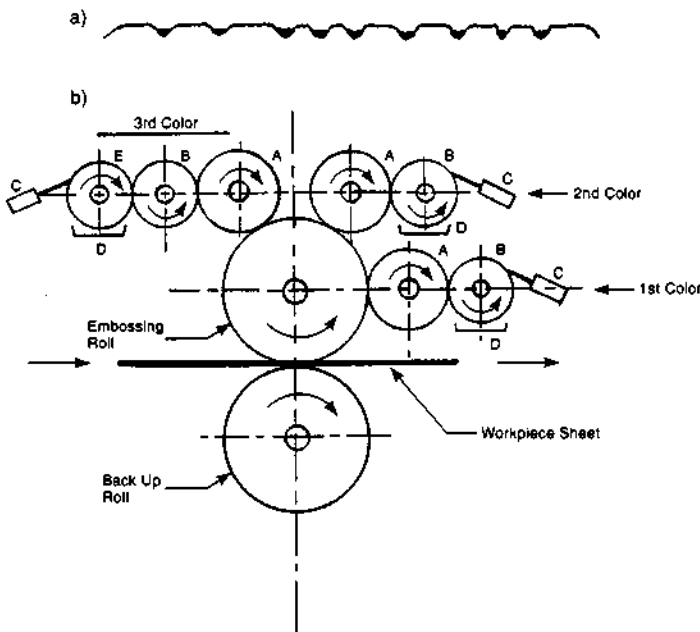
M6 Valley embossing and printing of film or sheet.<sup>2</sup> a) Valley printing - printing in the depressed areas of an embossed sheet. b) Schematic view of combination embossing and valley printing equipment: A - patterned applicator rolls, B - analog rolls, C - doctor blade to remove excess ink, D - ink pan, E - furnisher roll.
